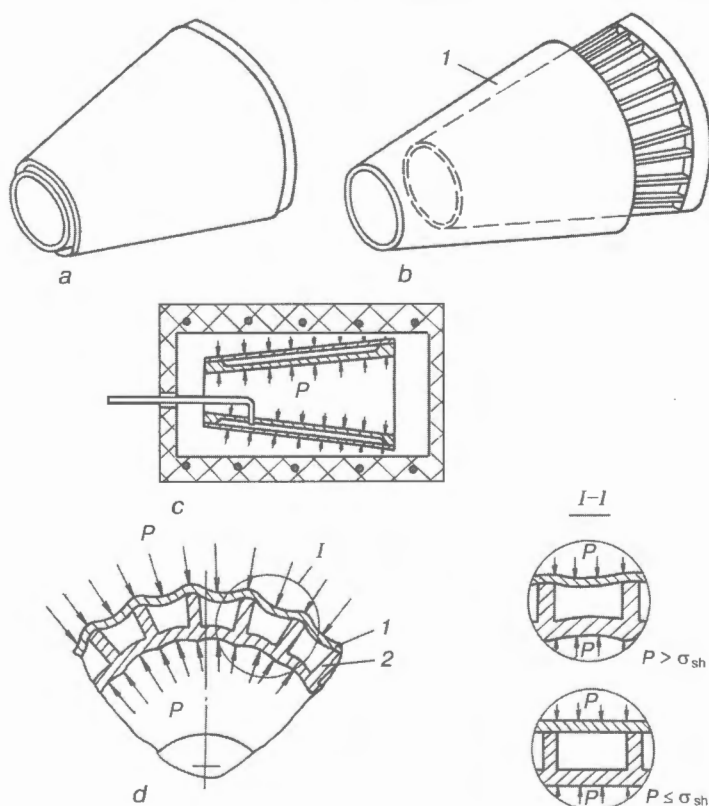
Process sequence of diffusion bonding with low-intensity force action of complex-shaped structures: *a* — required structure; *b* — blanks for welding; *c* — welding process; *d* — nature of deformation of structural elements in welding; 1, 2 — outer and inner shells, respectively (σ_{sh} — residual stress of shell deformation in unsupported sections of the structure)
